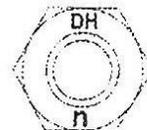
3/4-in. (19-mm) Threaded Rod, Test No. IBBR-1
